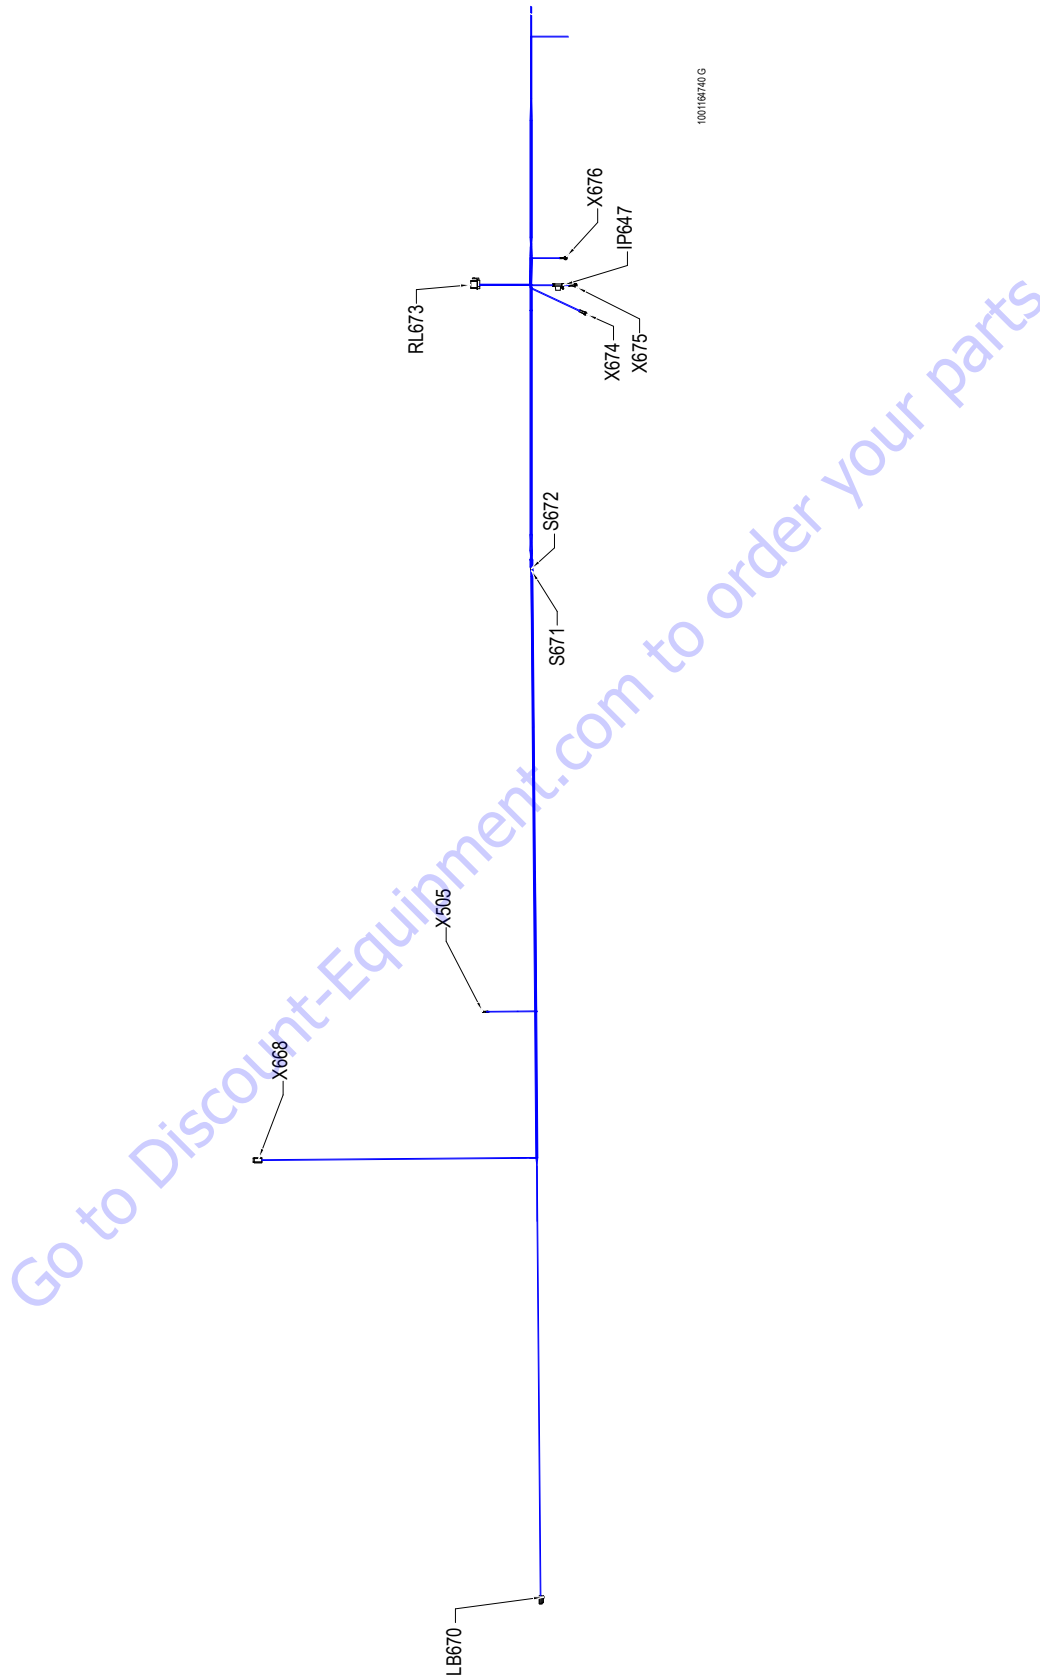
Chassis Head and Tail Lights Harness - Sheet 2 of 5
